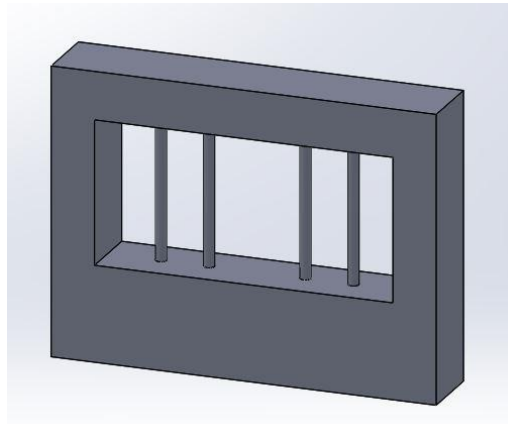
SolidWorks Model for printing struts for surface roughness measurement
